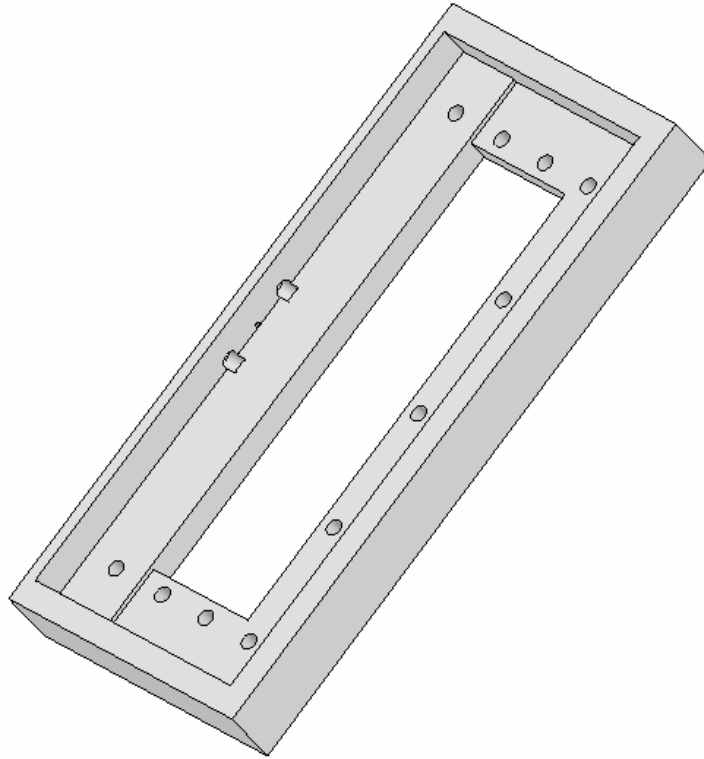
Mechanical Fixture of the Fabricated 8x2 Patch Array Antenna
